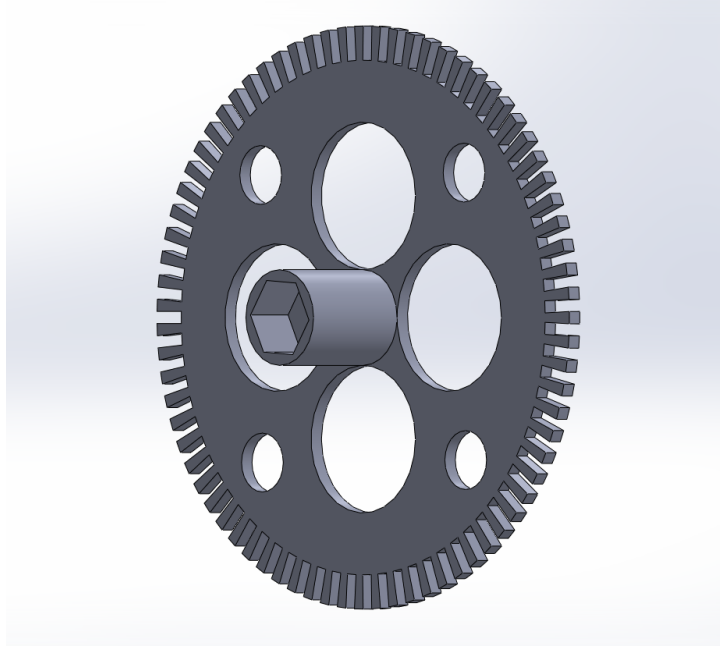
3D printed incremental optical rotary encoder and IR motor encoder module
